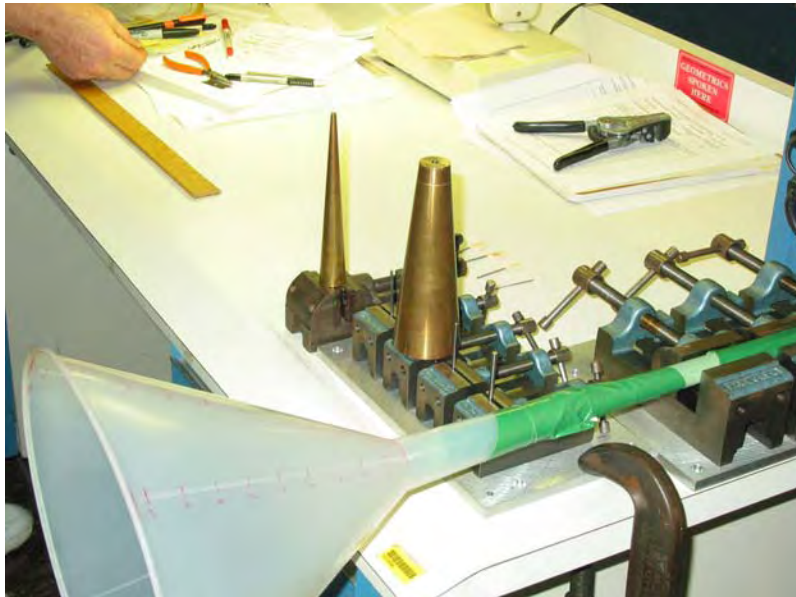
Conical Fixtures Used for Mandrel Insulation Tensile and Elongation Method
